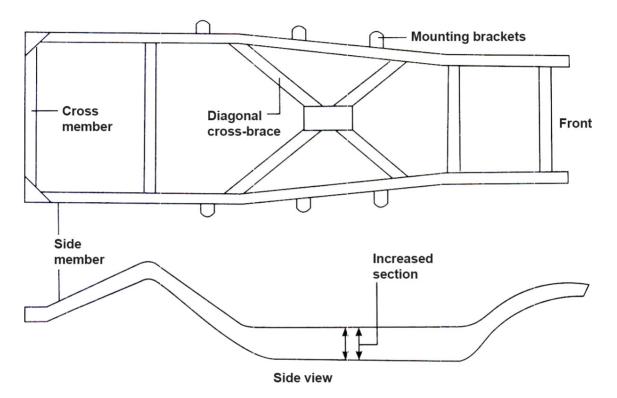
X-frame (SUV/Passenger car chassis frame).
